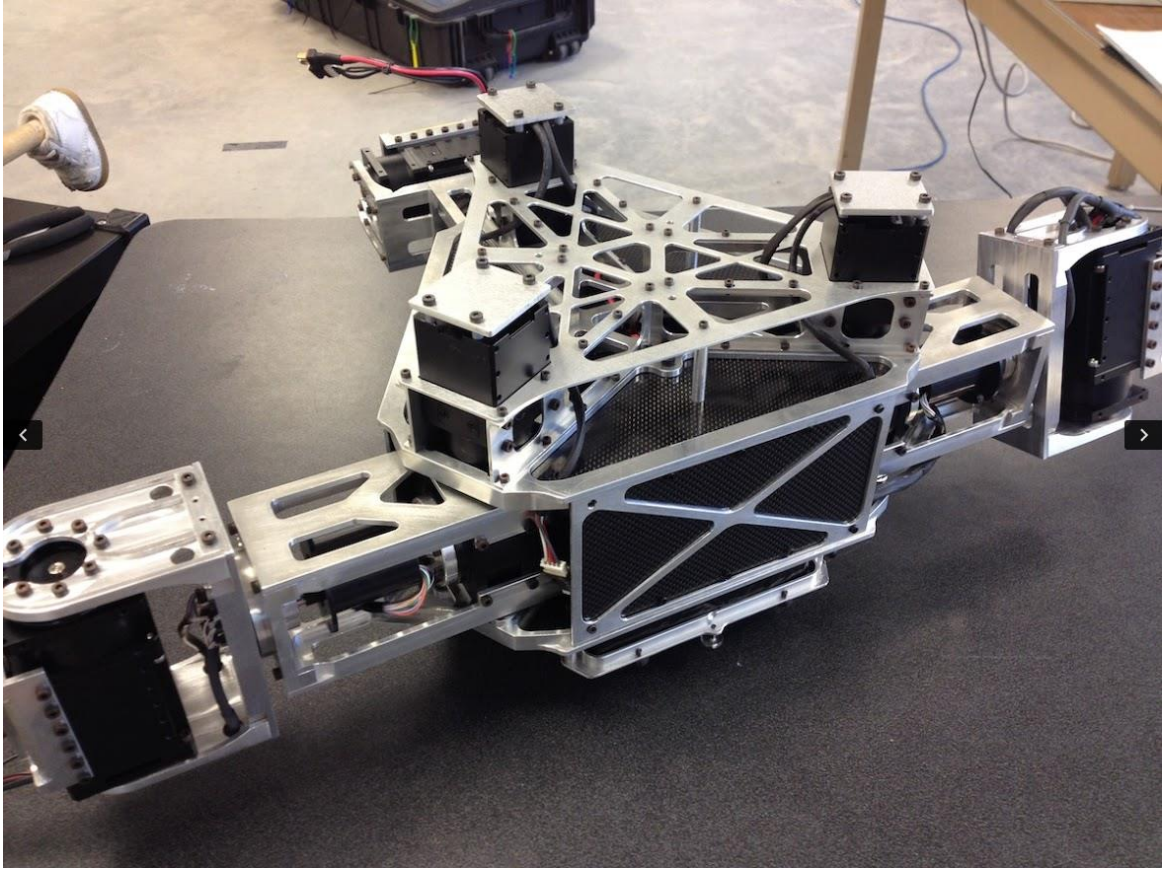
Completed View of Bottom Side of Body and Hip Assembly
